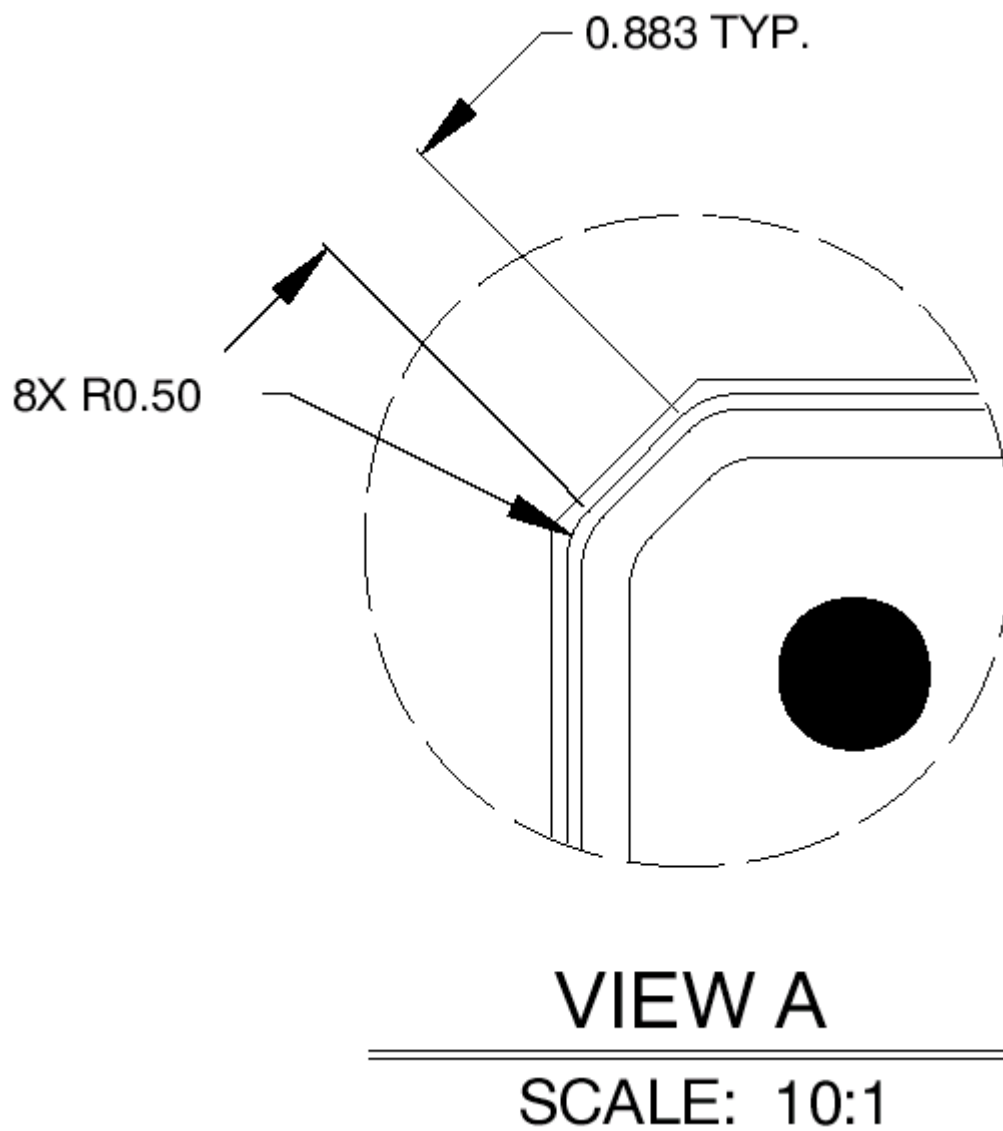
MQ-200 Micro BGA Package Package Corner View A (reference ball 1).
